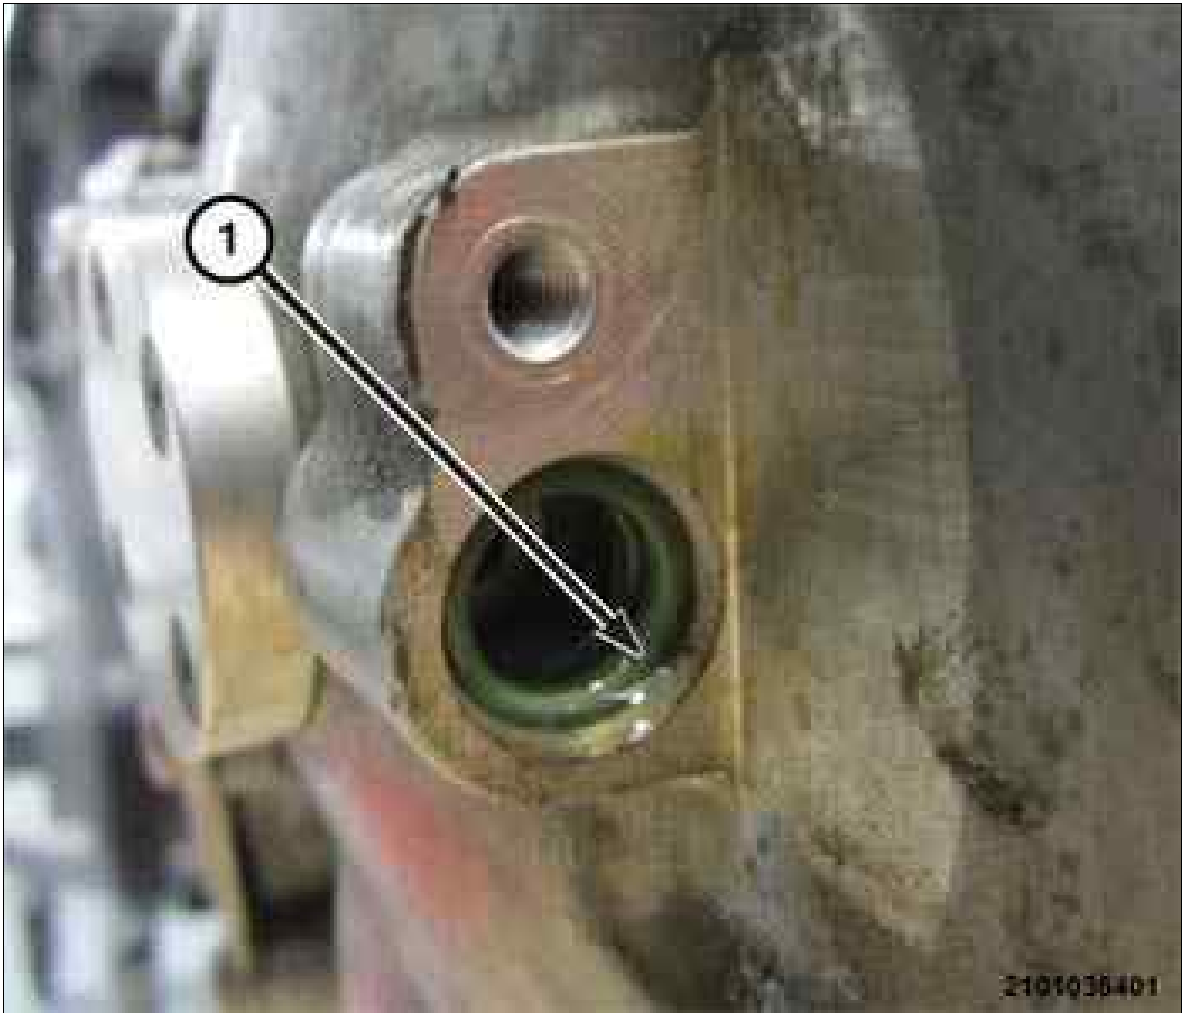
O-Ring Seal Near Differential End For Oil Supply Tube
